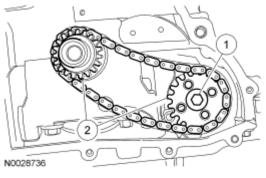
Identifying Chain & Sprockets Courtesy of FORD MOTOR CO.
